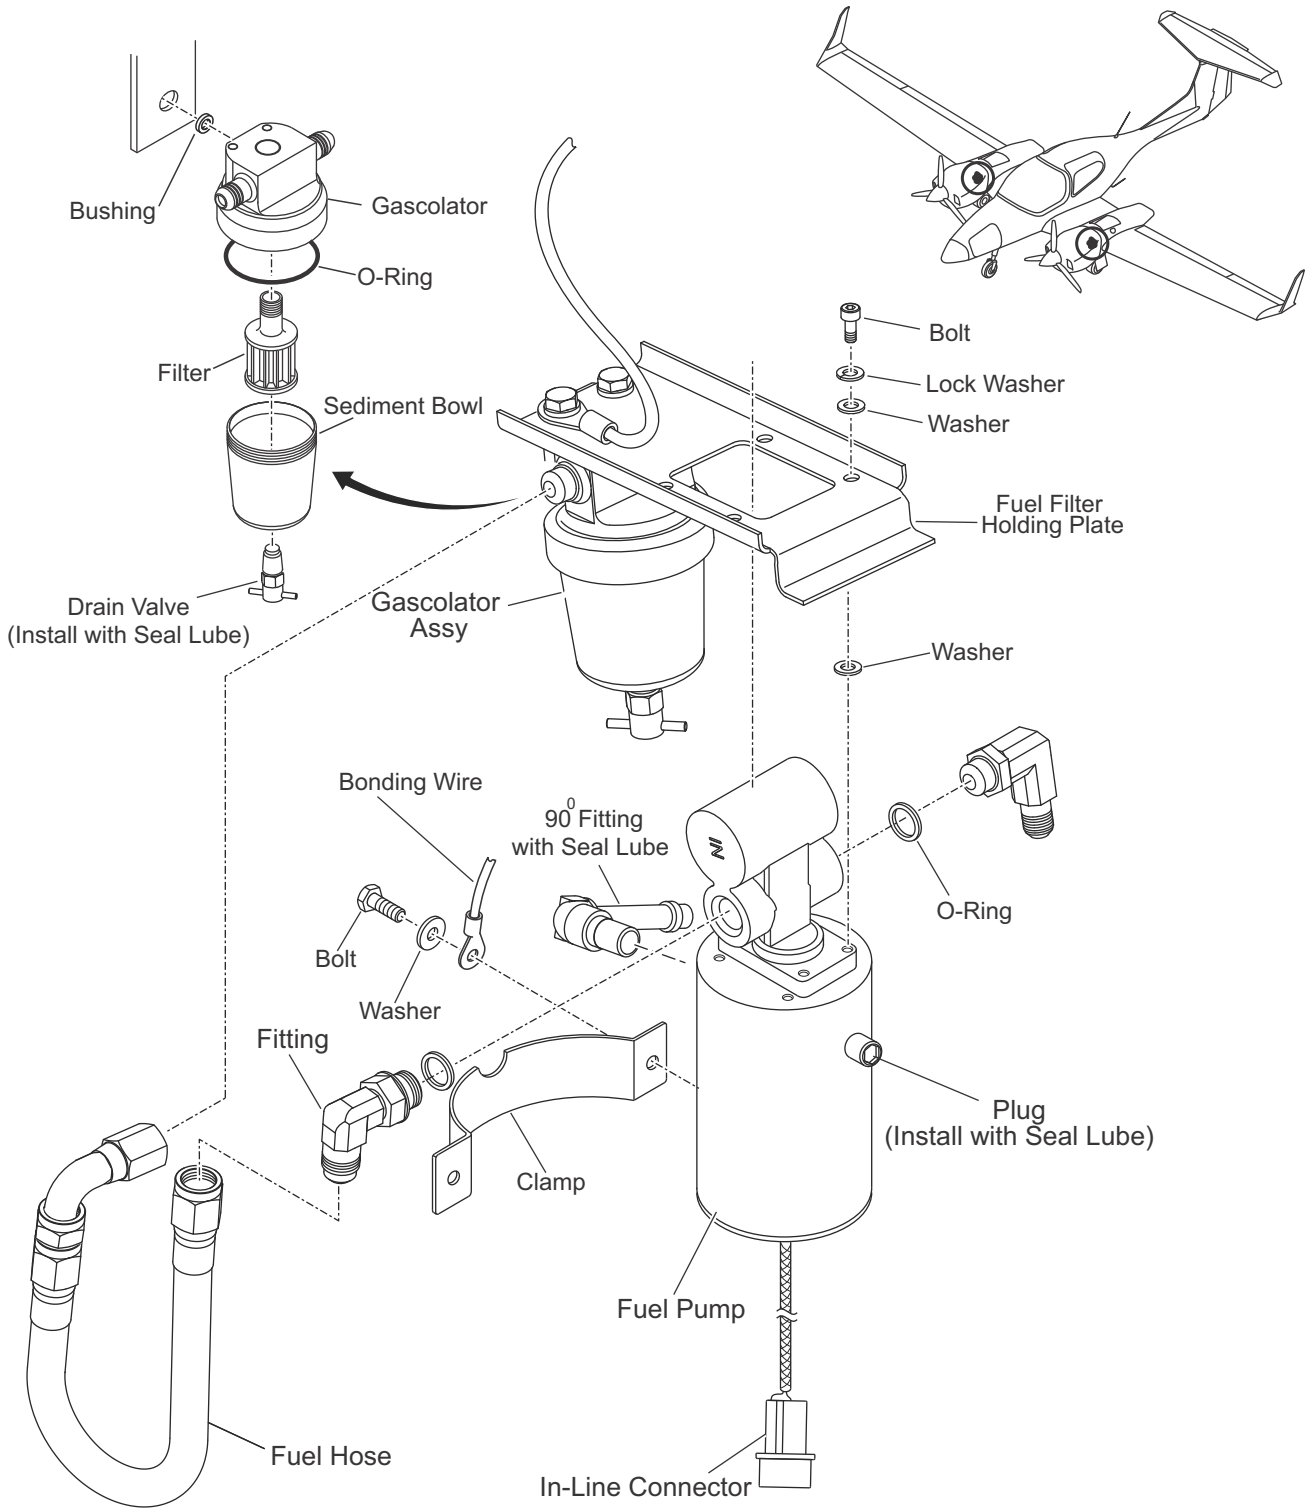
Fuel Booster Pump and Gascolator Assembly (RH)
